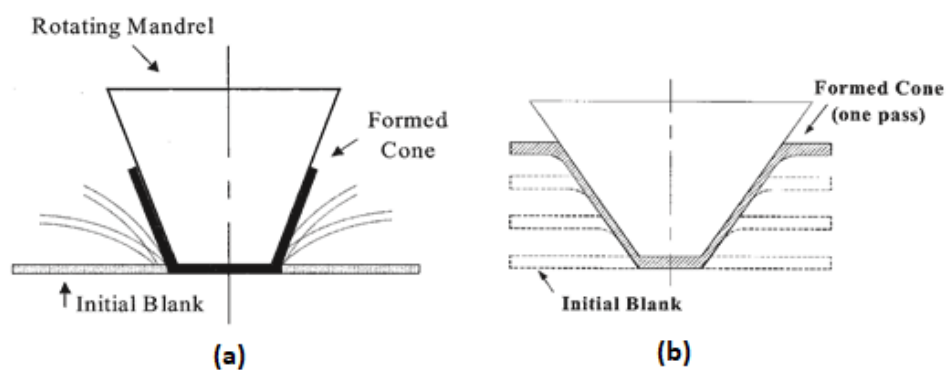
Conventional ISF (a) Traditional spinning process (b) shear forming of a inverted cone with a single pass of mandrel [3].
